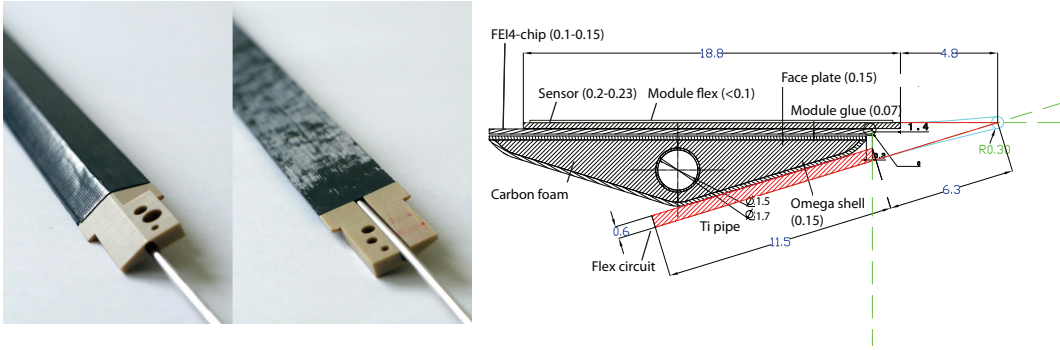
Photographs of a complete full length carbon-fibre stave with cooling pipe (left). Stave cross section drawing with dimensions in mm (right).
